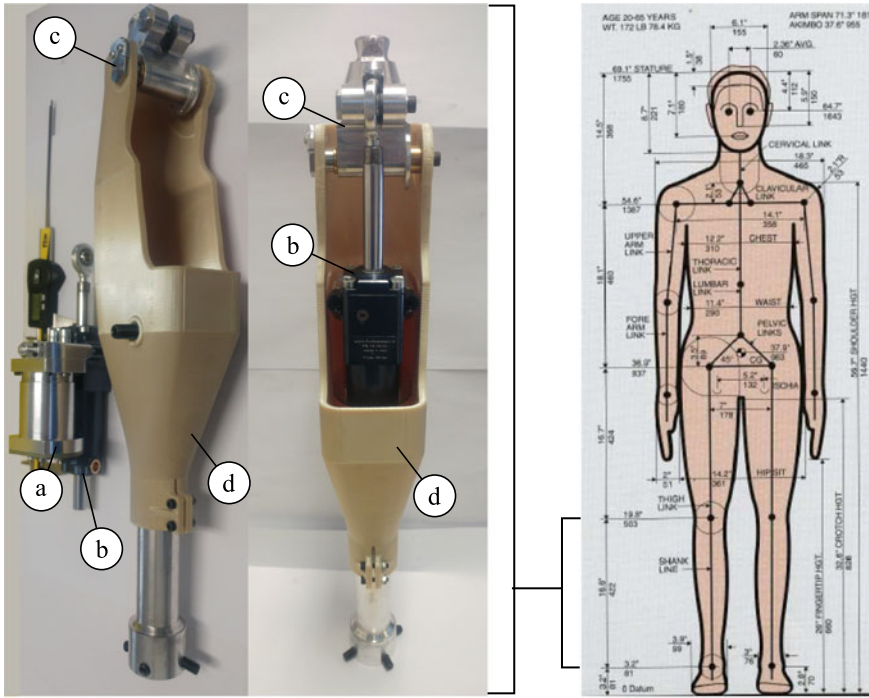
Knee prosthesis EHA disassembled (left) and assembled (center). a motor-pump group, b hydraulic actuator, c knee joint, d body
